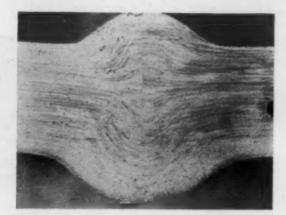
Macrograph of tube wall crosssection reveals details of pressure weld.
